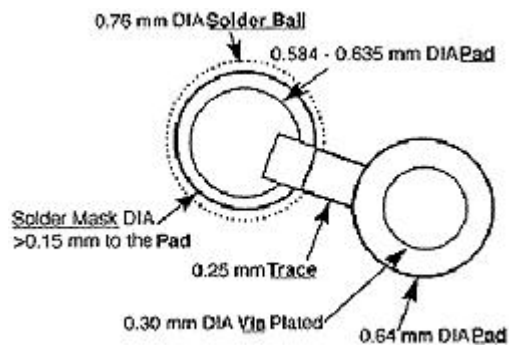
Recommended PCB pad layout for MEG-Array® connectors.
